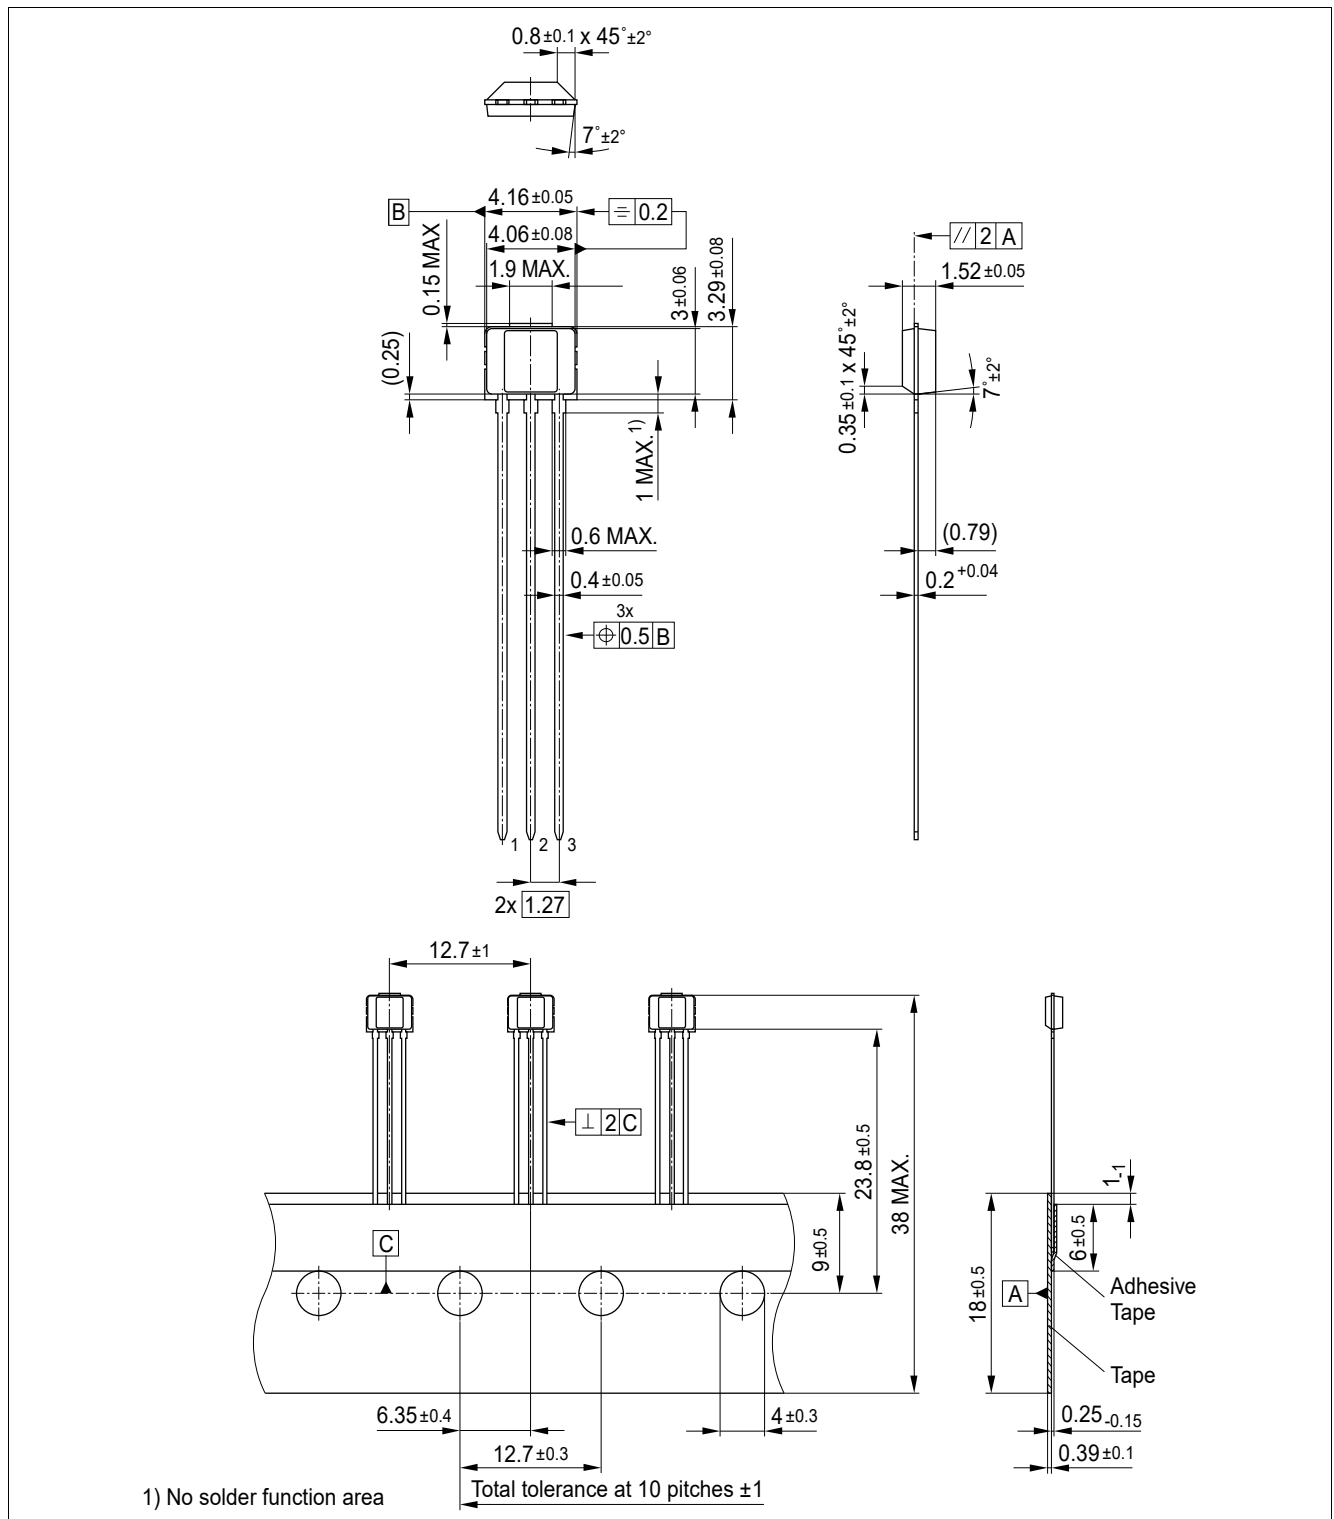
PG-SSO-3-2 package outline (all dimensions in mm)
